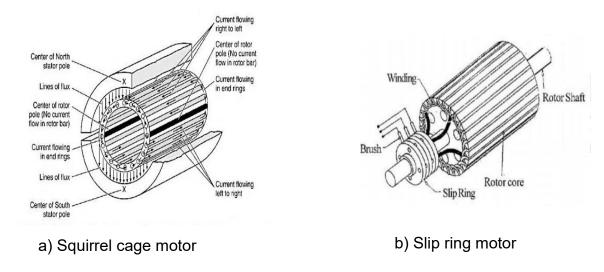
Cross-sectional view of a squirrel cage motor and slip ring motor. [10]
